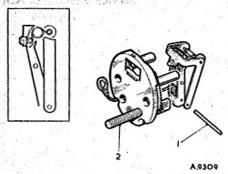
Fitting the rocker assembly to the pedestal. (Inset) the correct position of the centre toggle spring
